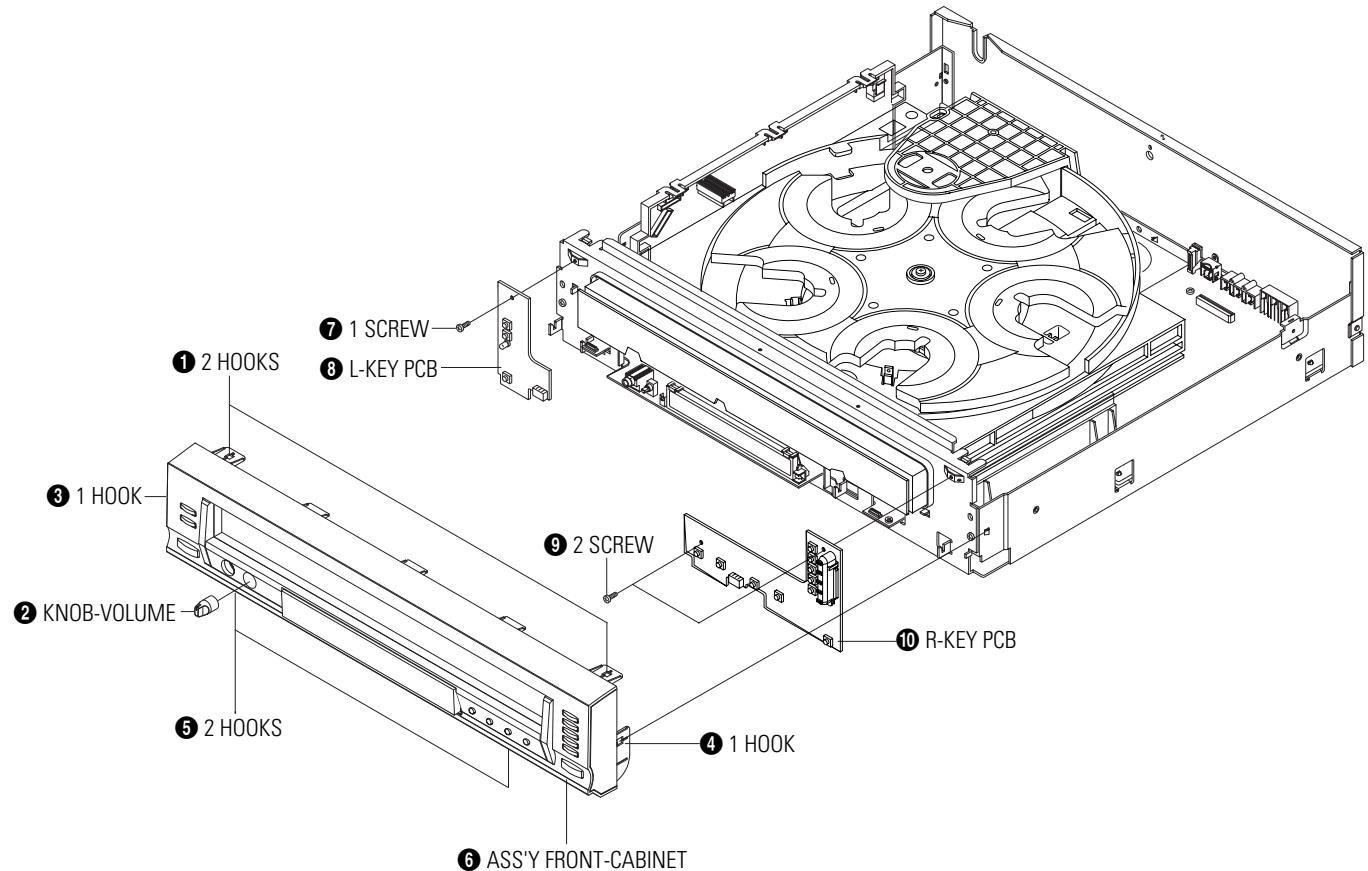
Ass'y Front-Cabinet, Key PCB Removal
